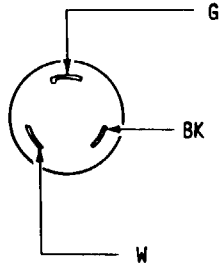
Power Cable Assembly, 11021166, Units 2 and 3, M35A2.
